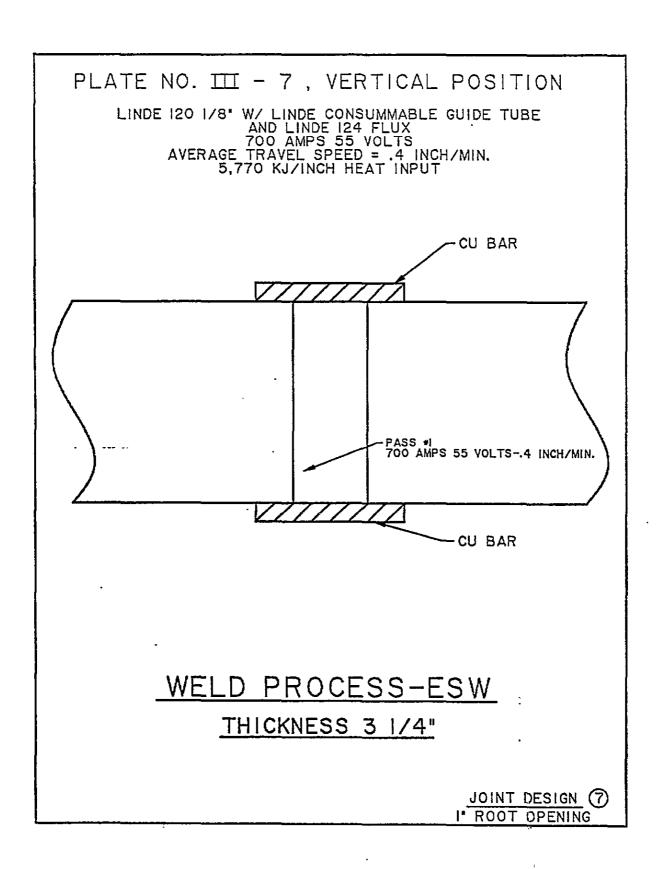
Electroslag Weld Test Assembly for 3-1/4-Inch Thick 100 ksi Yield Strength Steel Plate ;
